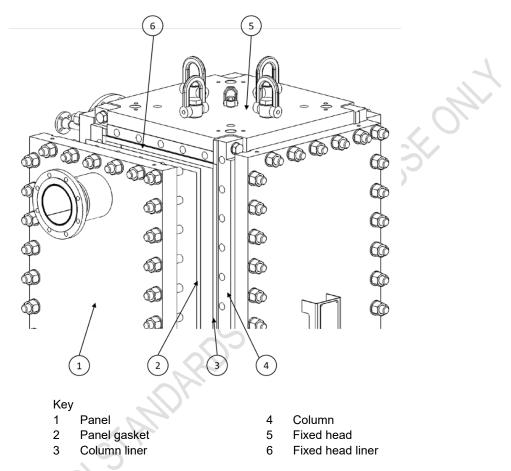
Typical Construction of Column Configuration and Attachment to Fixed Head and Removable Panels
